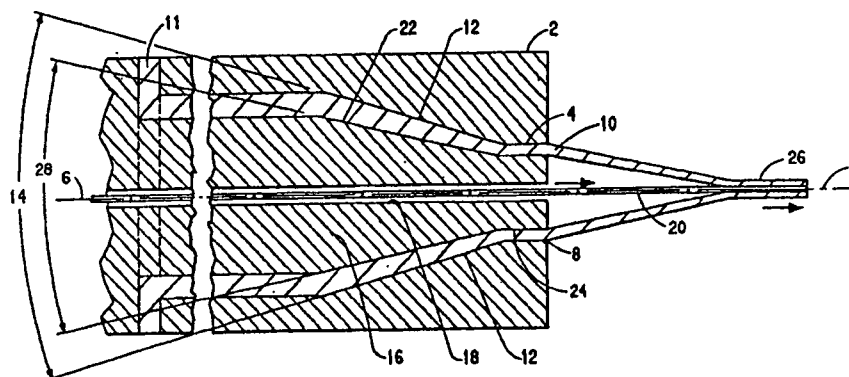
Crosshead die for wire coating (from Buckmaster *et al.*, 1997)
